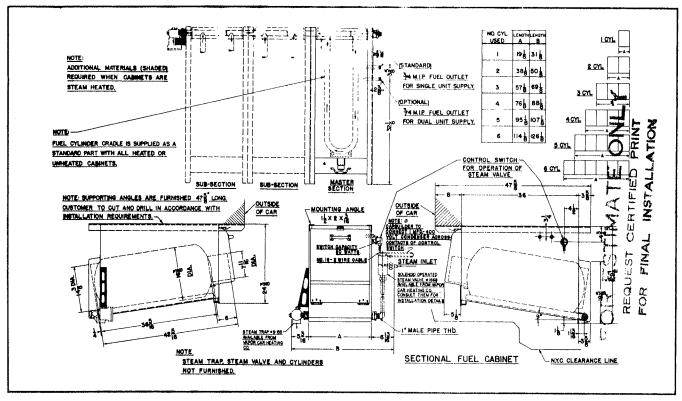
INSTALLATION OF SECTIONAL TYPE FUEL CYLINDER CABINET (SK-1051-C)
